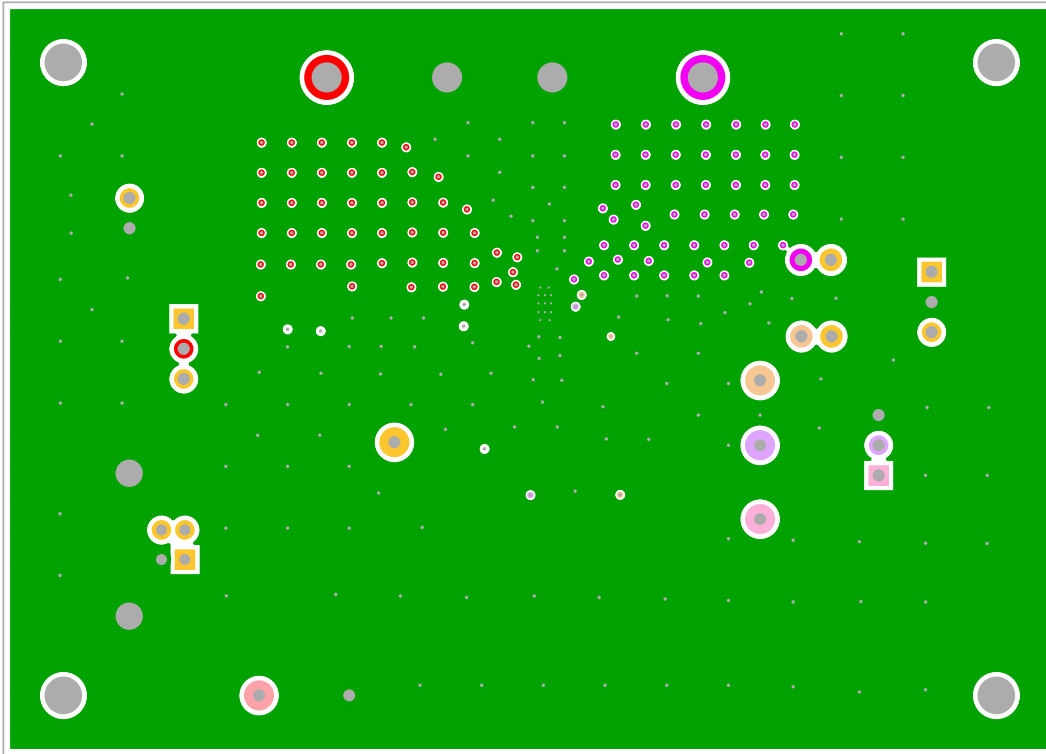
BOTTOM LAYER SOLDER SIDE
